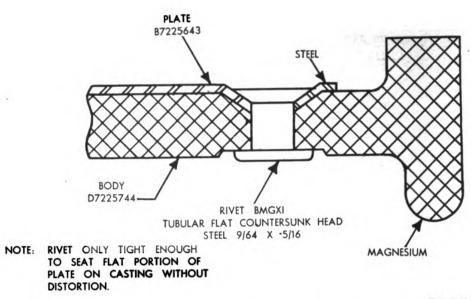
20-mm feed mechanism M3-Attaching cover plate to stripper cover.
